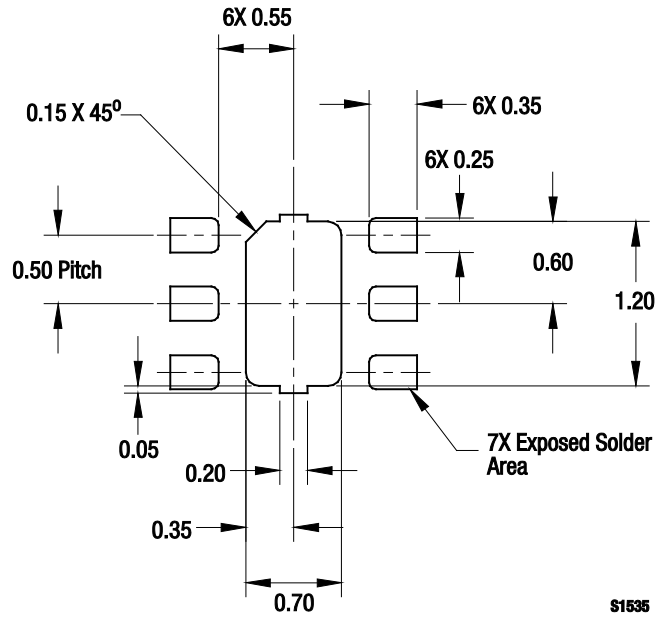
SKY13314-374LF PCB Layout Footprint (Top View)
